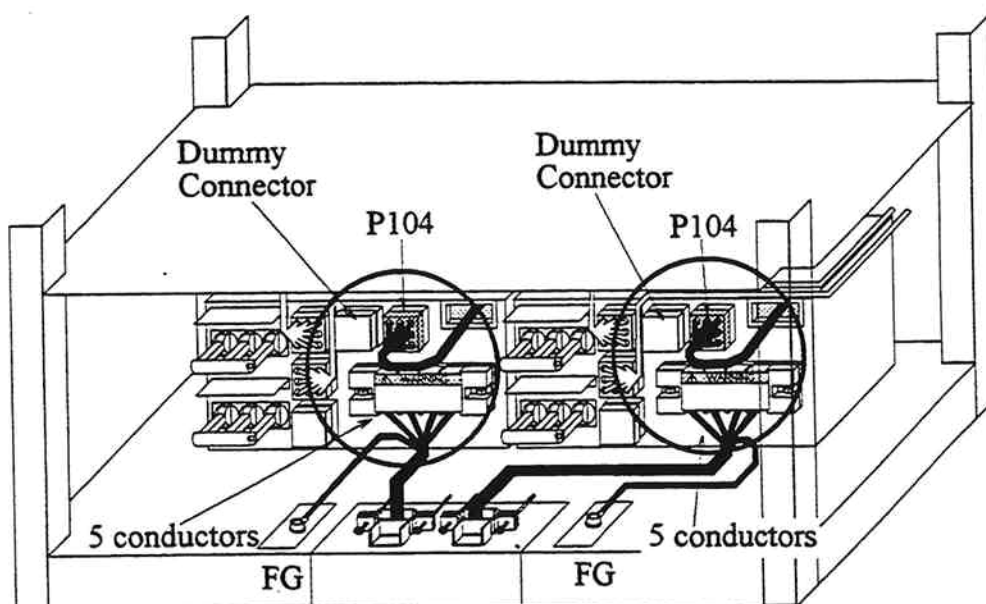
AC Input Cable Conductors and Jumper Cable (P104) Positions 380-415Vac
